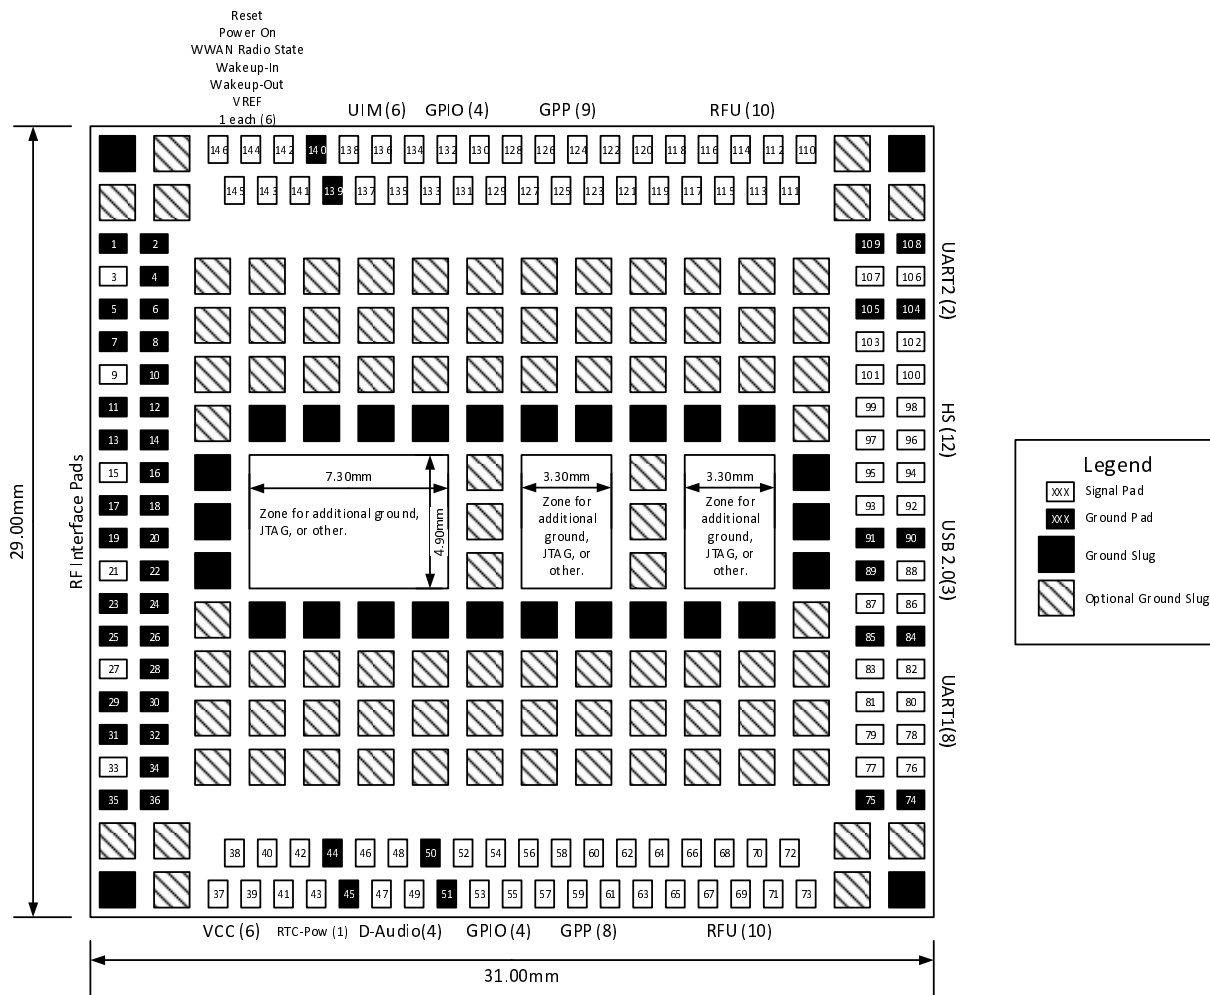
SMT3129 black and white physical form factor (899 mm<sup>2</sup>), dimensions, pad numbering and placement
